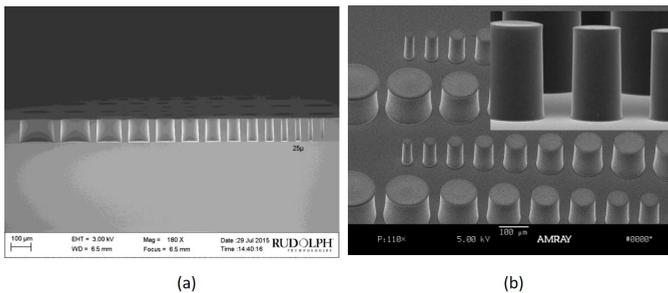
SEM images of tall Cu pillars. (a) The thick photoresist mold used for Cu plating. (b) The plated Cu pillars after photoresist removal. Figures adapted from [21].
